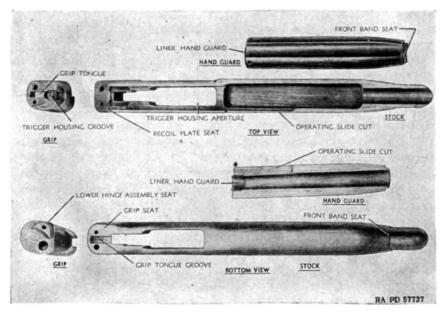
Stock, hand guard and grip — carbine, cal. .30, M1A1.
